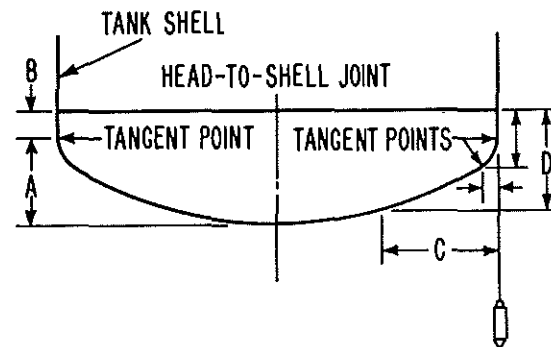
TANK BOTTOMS, IRREGULAR, UNSTABLE, OR BOTH, OF UPRIGHT CYLINDRICAL TANKS.
